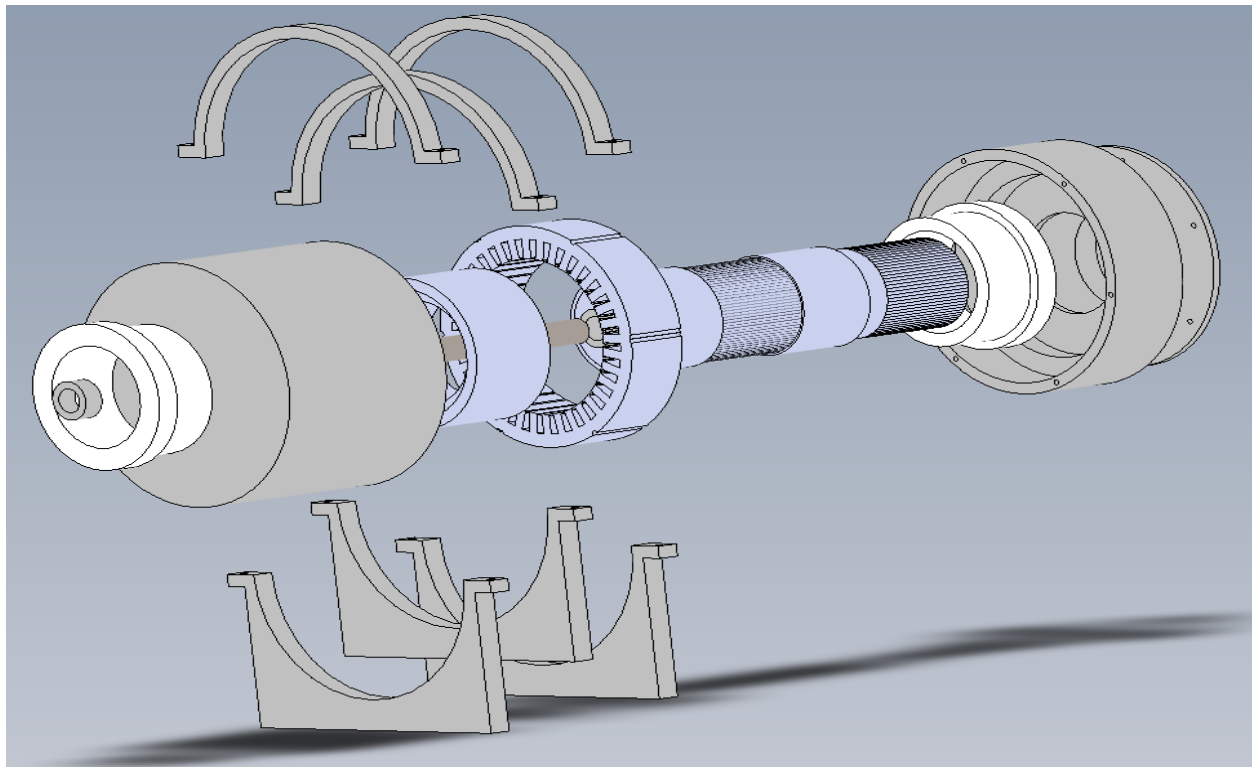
Different parts of machine assembly designed in SolidWorks software
